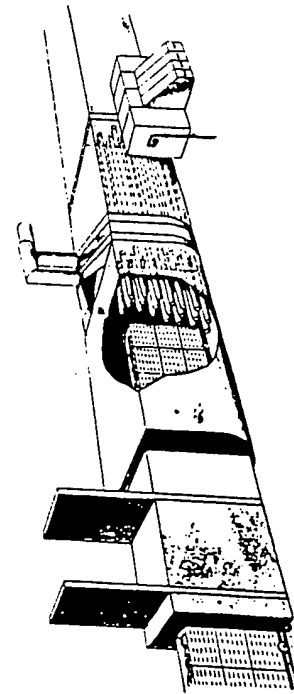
The L.M. Retort or Tunnel Kiln.
